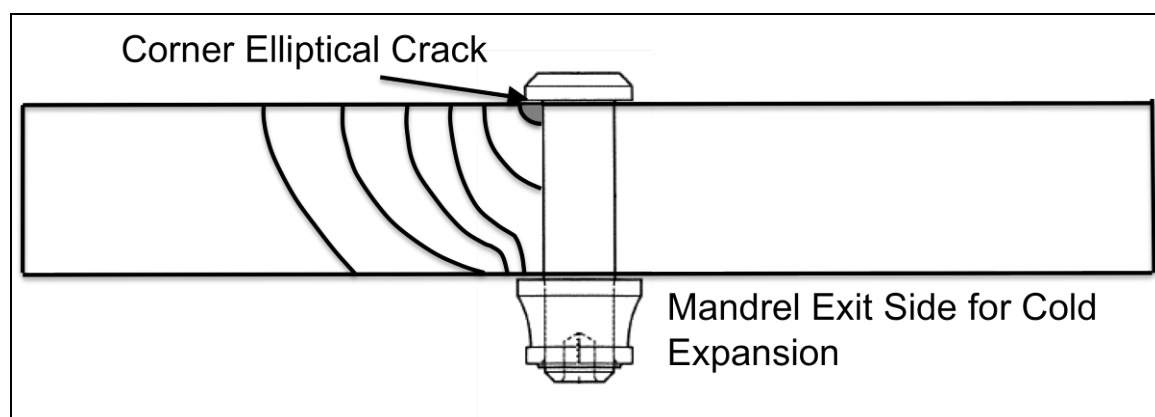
Possible fatigue crack propagation geometry during inspection of aircraft structures.
